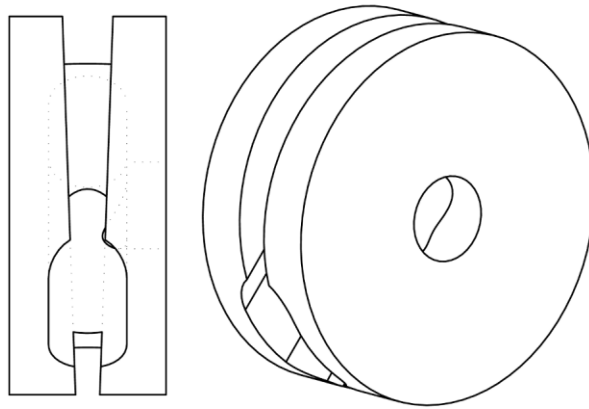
Illustration of required piston geometry with angled groove and slot for piston paddle.
